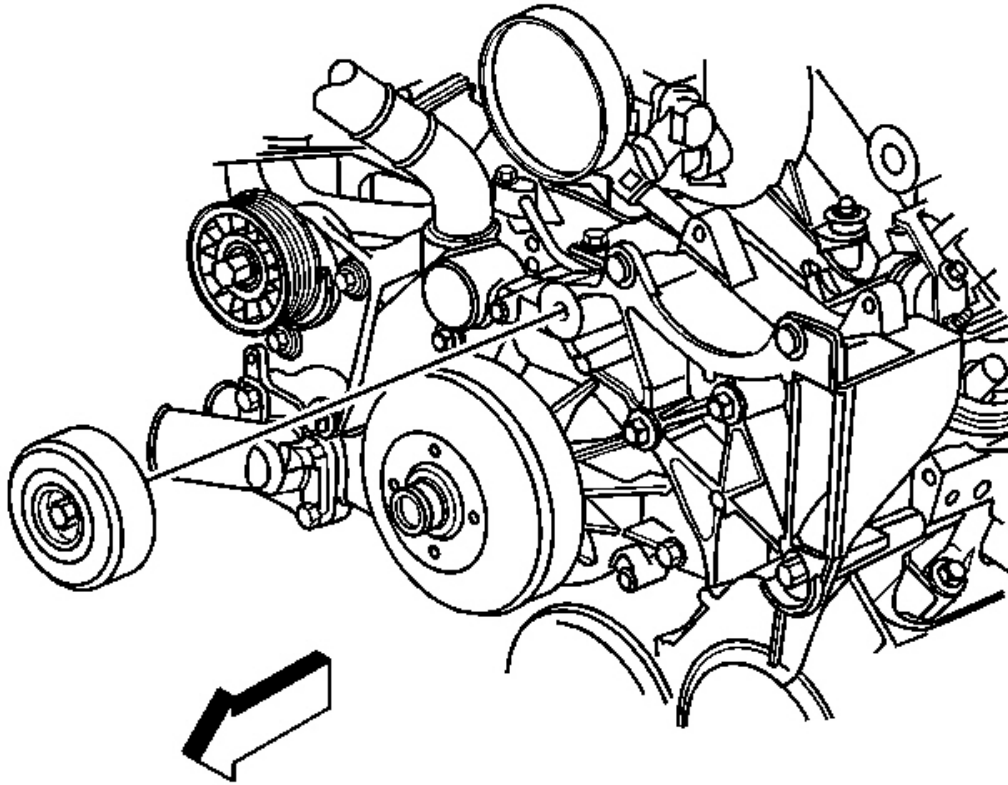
View Of Accessory Drive Belt Idler Pulley
